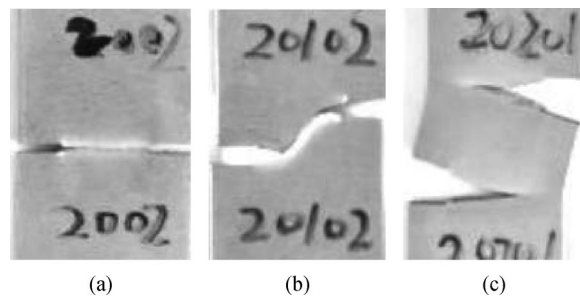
Experimental fracture results [55]. (a) 10-00 test; (b) 10-10 test; (c) 10-20 test
